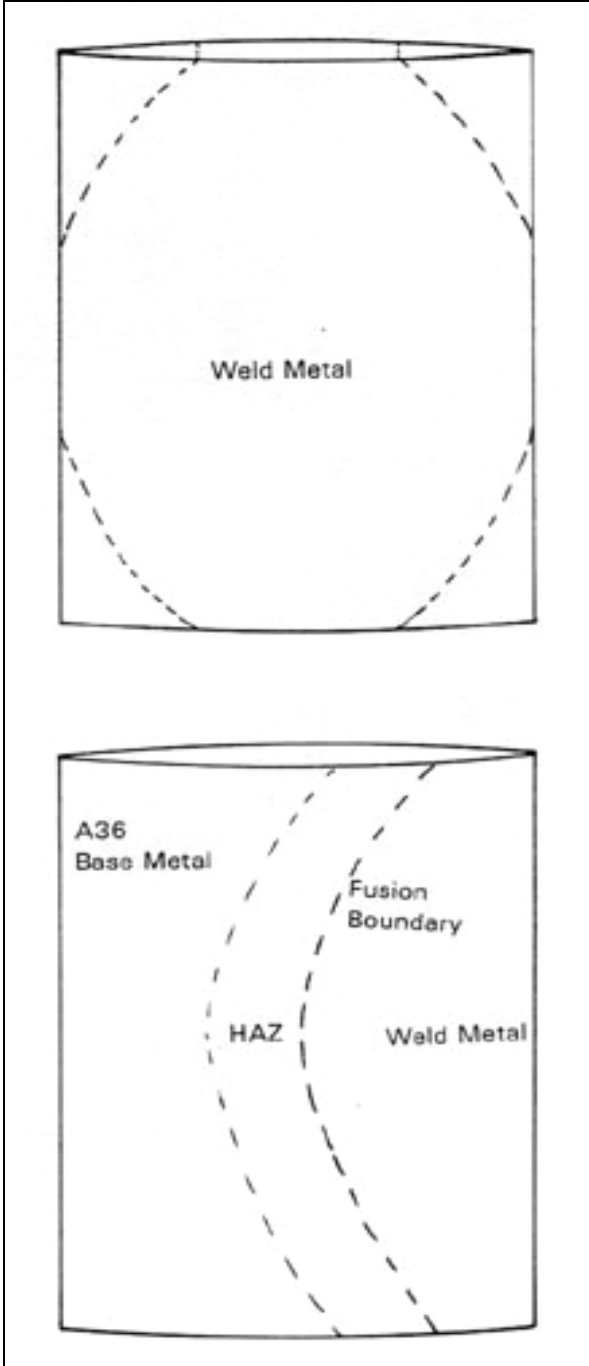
Depiction of how cores were centered to maximize weld and HAZ material of the ESW
